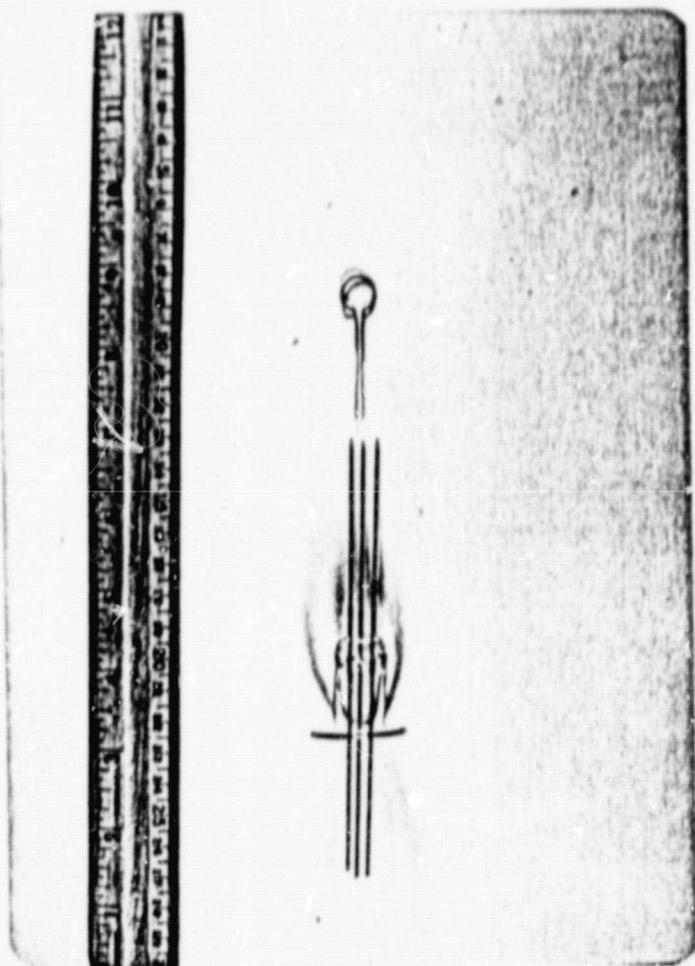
Collector spot-welded to tungsten lead-throughs
